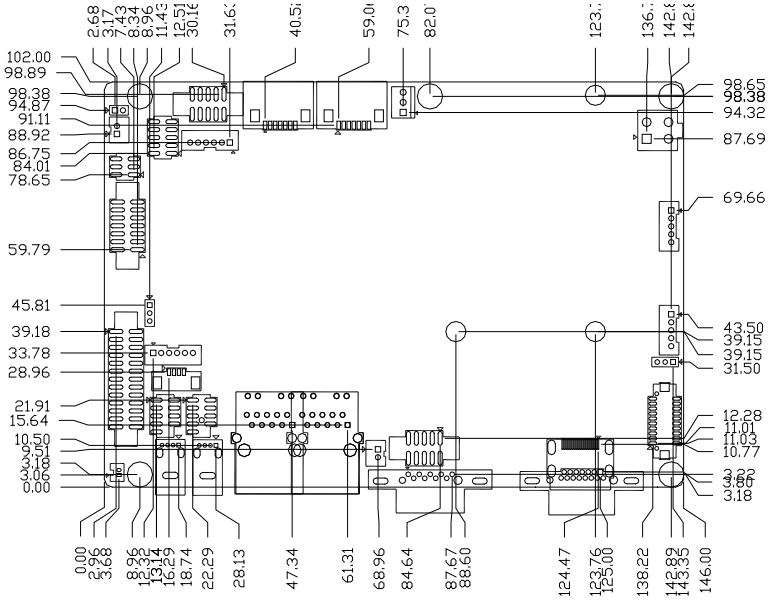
PCM-9363 Mechanical Drawing (Component Side)
